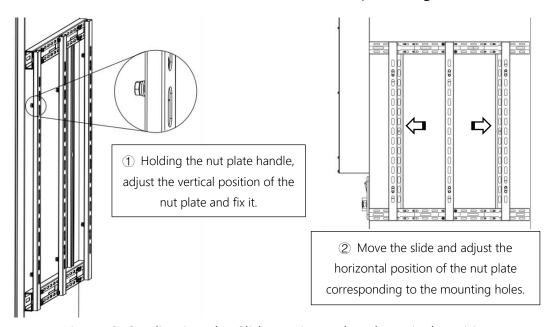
Adjusting the Slide Horizontal and Vertical Positions
